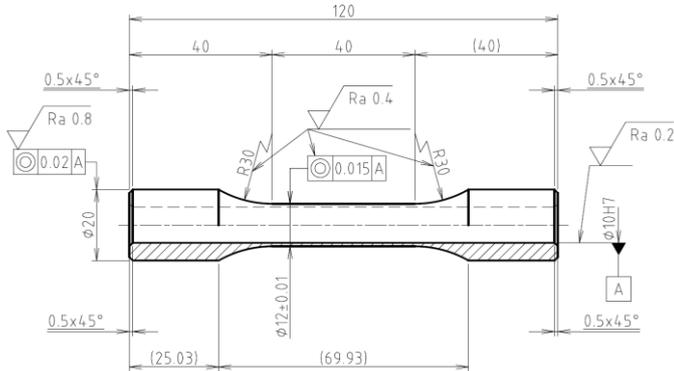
Design and dimensions of the test specimen manufactured from C60R steel (the dimensions are stated in millimeters)
